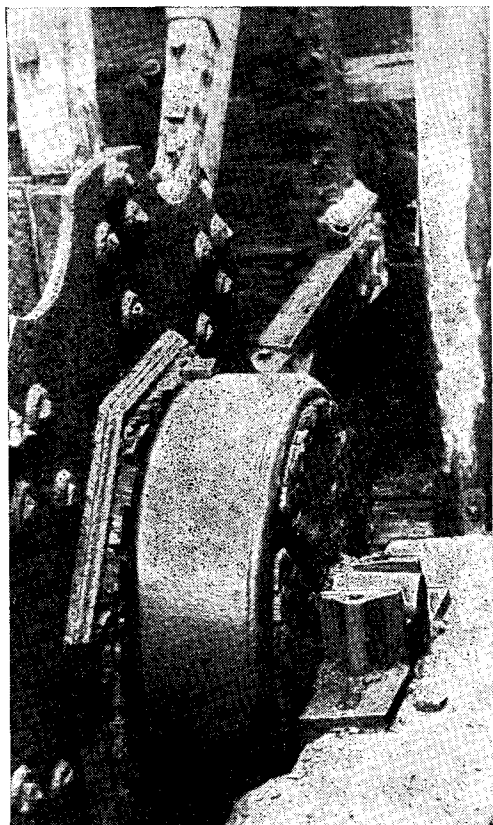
Centre of water-wheel and method of mounting wheel-shaft
